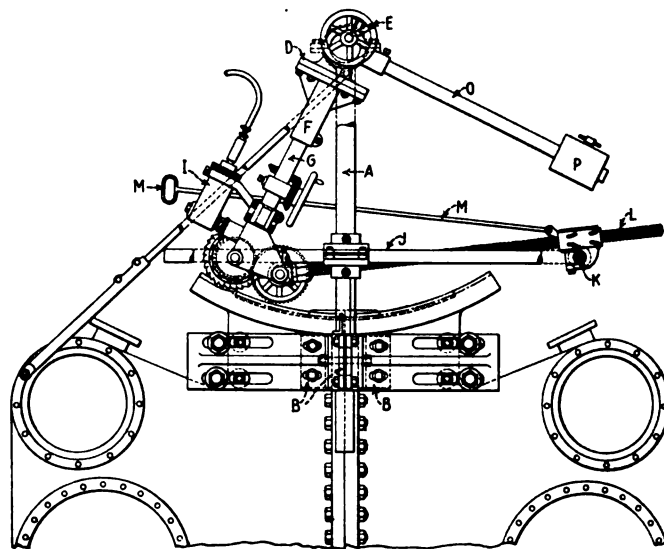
Front view showing the method of mounting the cylinder saddle miller
